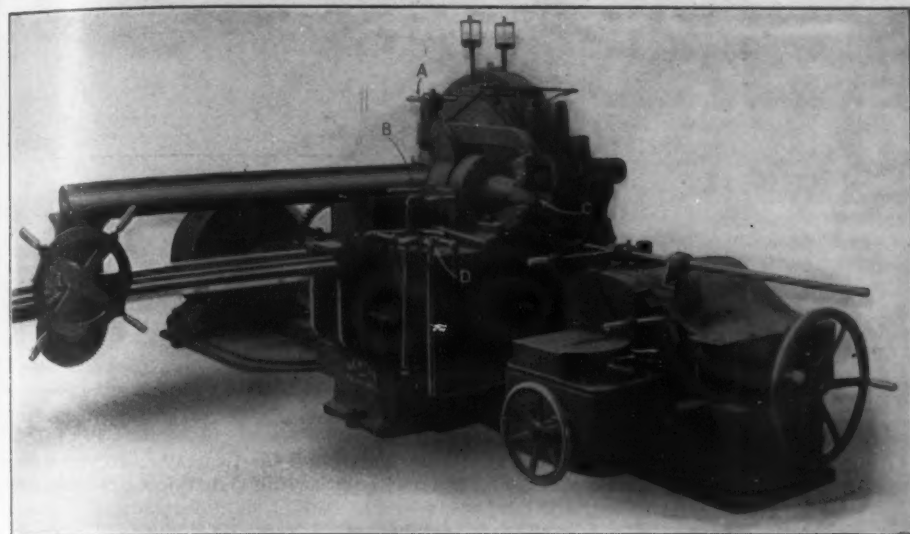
The Operating Side of a New Internal Cold Metal Sawing Machine Built by the Newton Machine Tool Works, Inc., Philadelphia, Pa.
